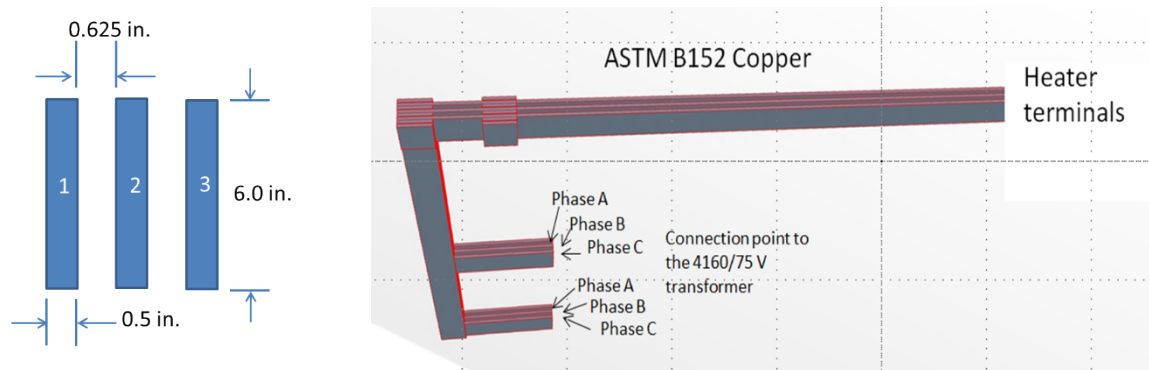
Copper bus bar assembly used during the Mach 8 experiments. LEFT: End-view of bus bars. RIGHT: Vertical bus at the left attaches to the 4169/75 V transformer output. Top horizontal bus connects to flexible cables which attach to the heater elements.
